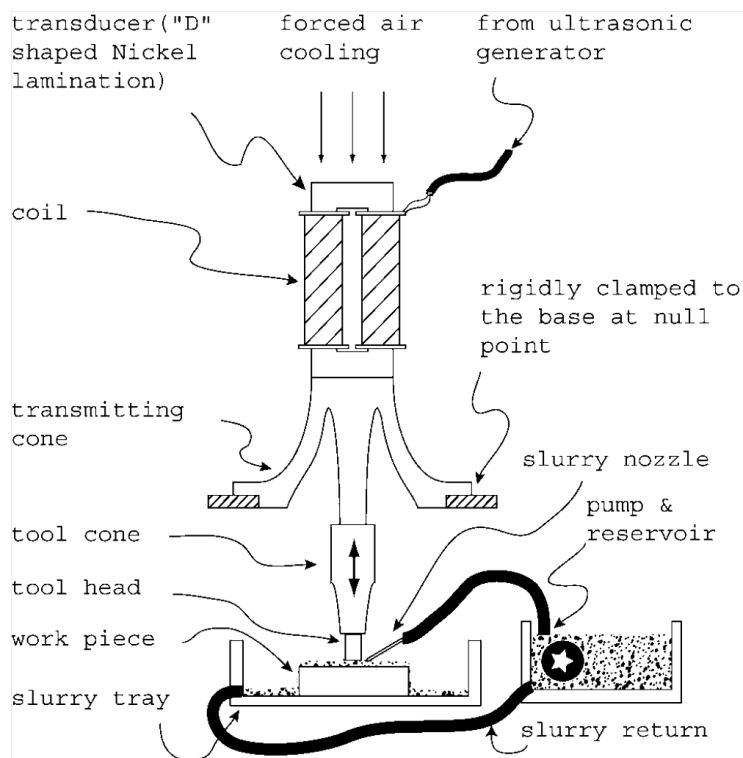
A sketch of a head assembly of a magnetostrictively driven UIG machine.
